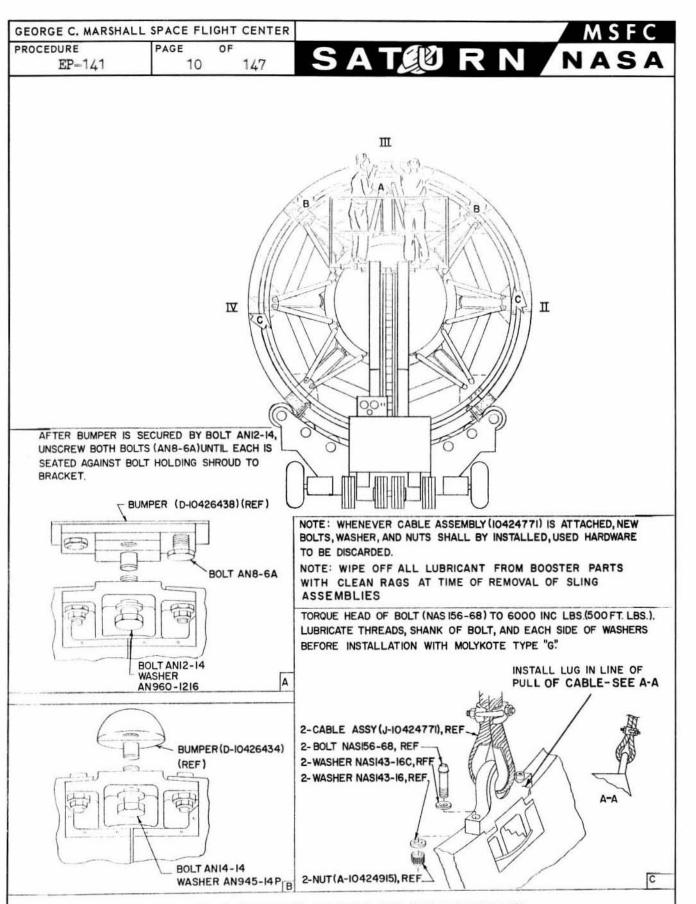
INSTALLING BUMPERS AND CABLE ASSEMBLIES
